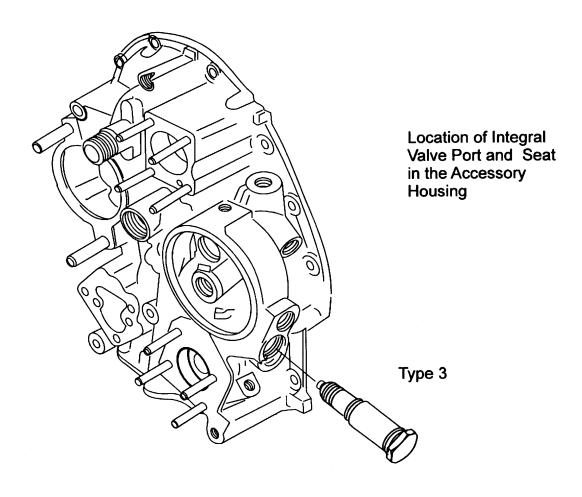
DUAL MAGNETO ACCESSORY HOUSING WITH INTEGRAL VALVE PORT AND SEAT
